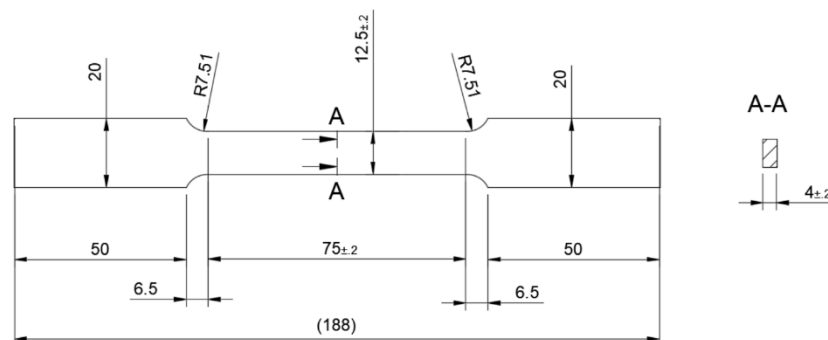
2D drawing of the specimen used for the tensile tests.
